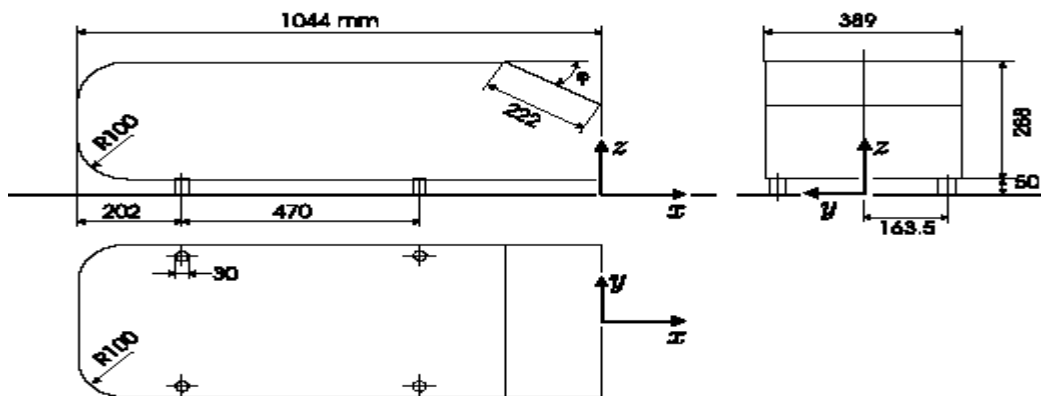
Schematic of the Ahmed body model - dimensions in mm.
